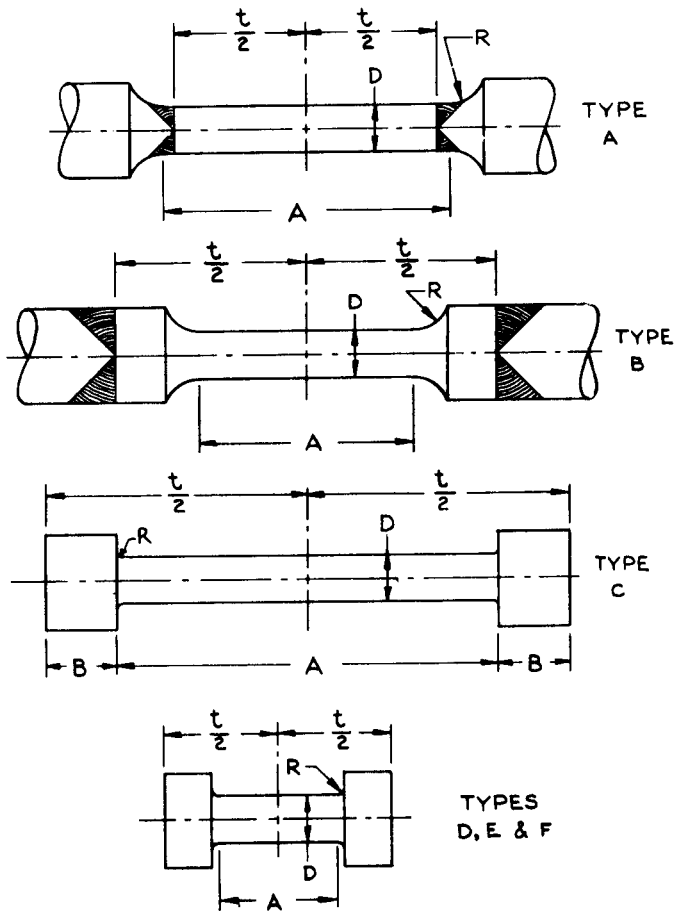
ALTERNATIVE TENSION TEST SPECIMENS
